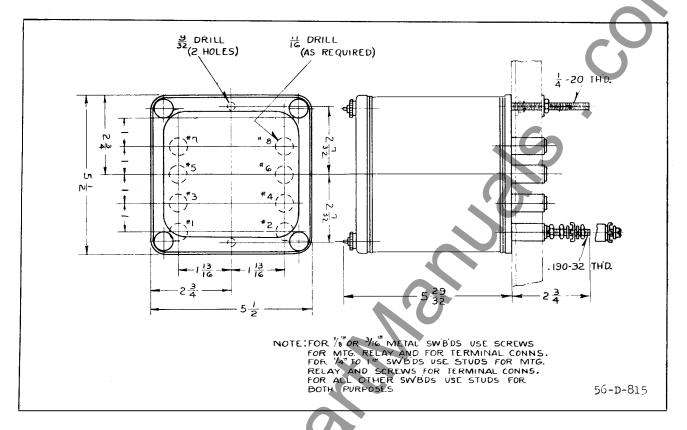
Outline and Drilling Plan for the Type TH Single-Element Relay.
